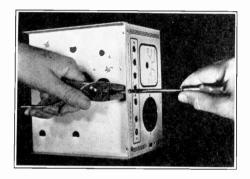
Fasten the front panel to the chassis exactly as shown here. Use a medium-size screw-driver to tighten each screw while holding its nut with ordinary pliers.
